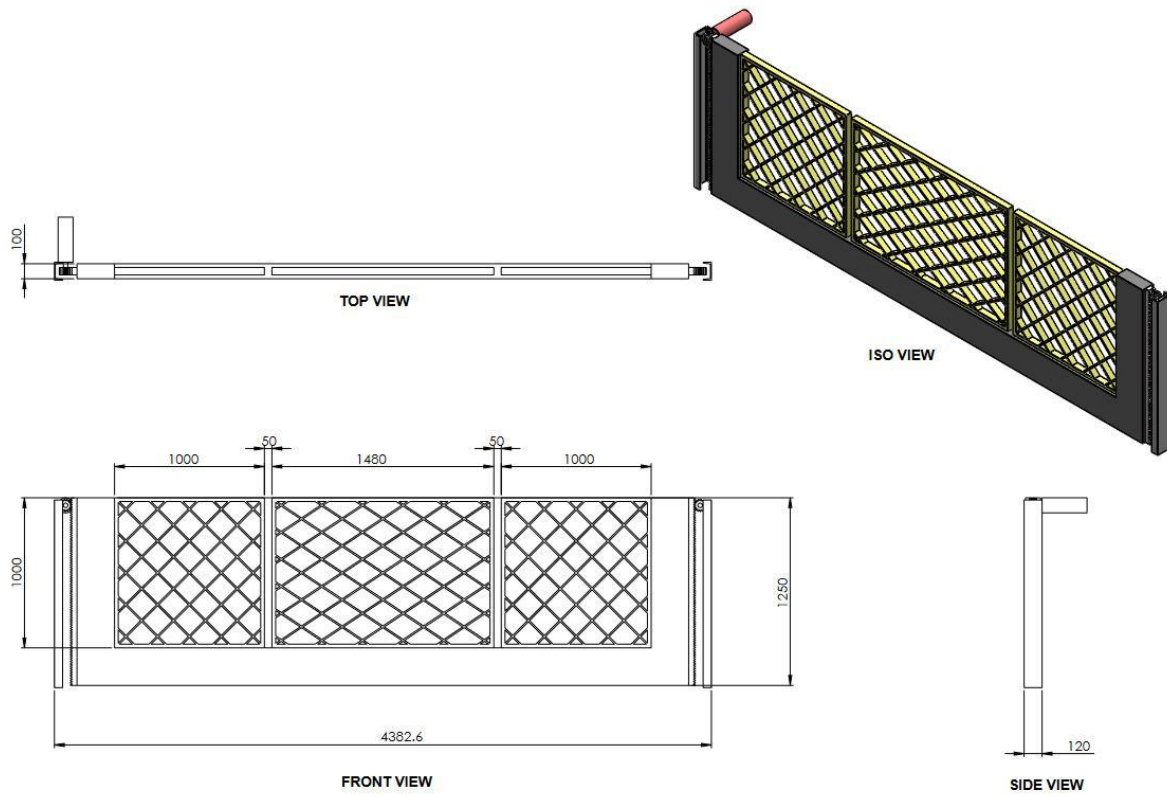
Front, top, side, and isometric views of the barricade with overall dimensions in millimeters (SolidWorks 2020).
